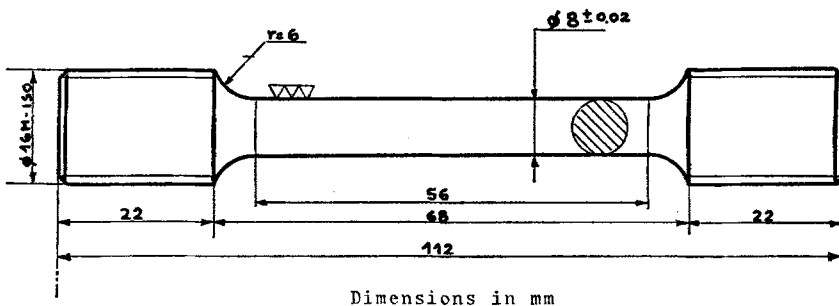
Cylindrical specimen used in strain-rate tests for Stainless Steel type 316L
